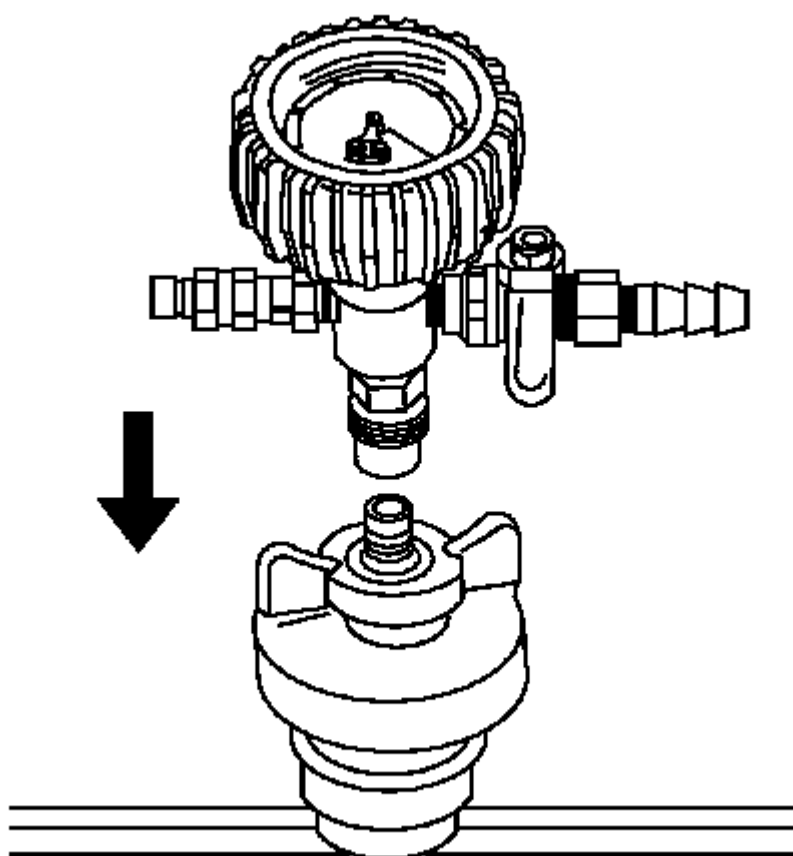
Attaching The Vacuum Gage Assembly To The Vac-N-Fill Cap
